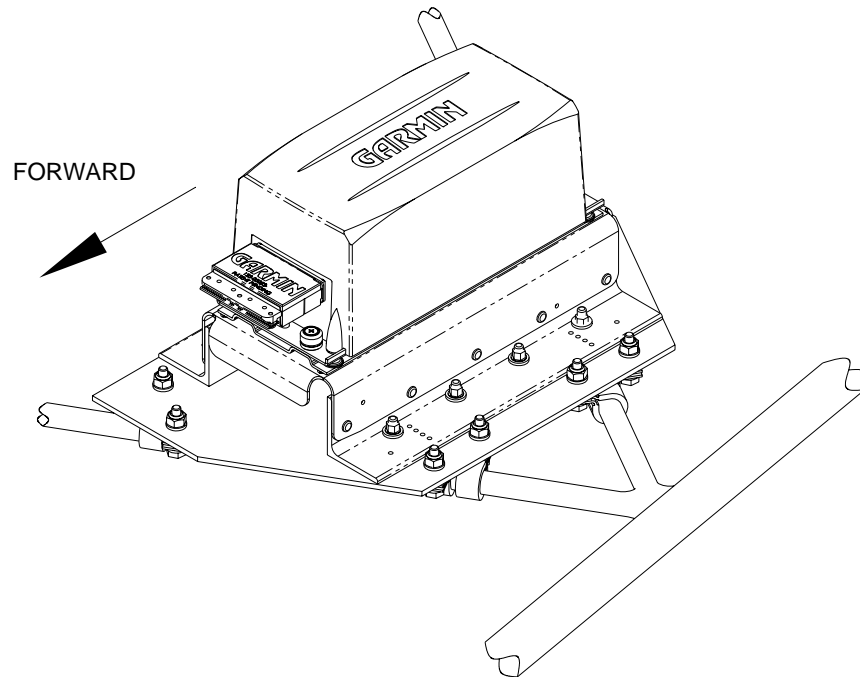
Universal Mount (Tube and Fabric Aircraft)
